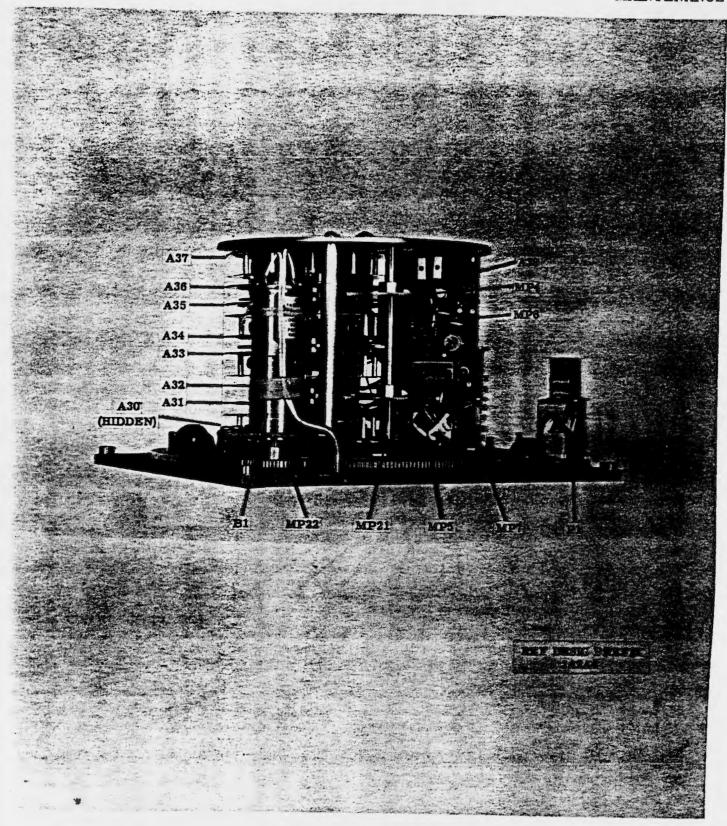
RF Amplifier Electronic Assembly, Turret Removed, Rear and Right Side View, Component Location
